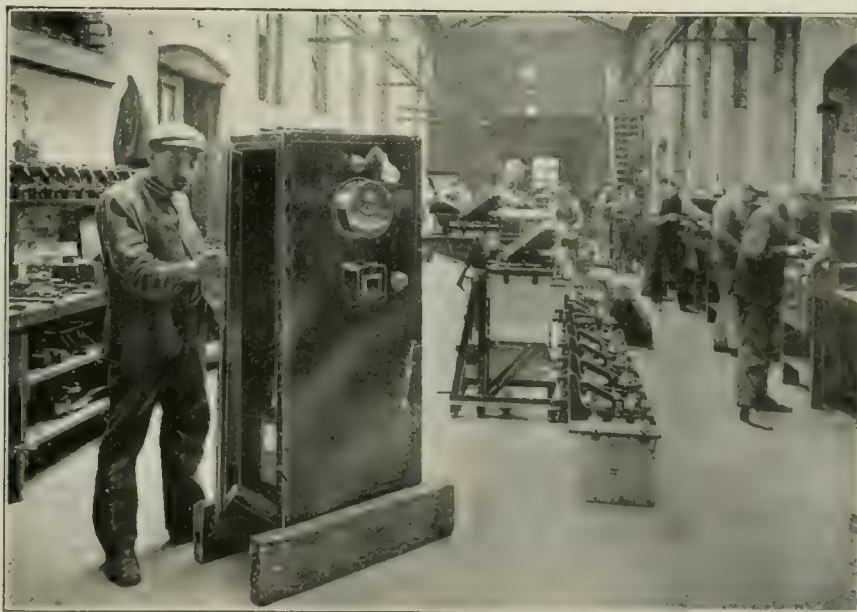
IRONCLAD AND COLLIERY SWITCHGEAR, ERECTING, SHOP.
